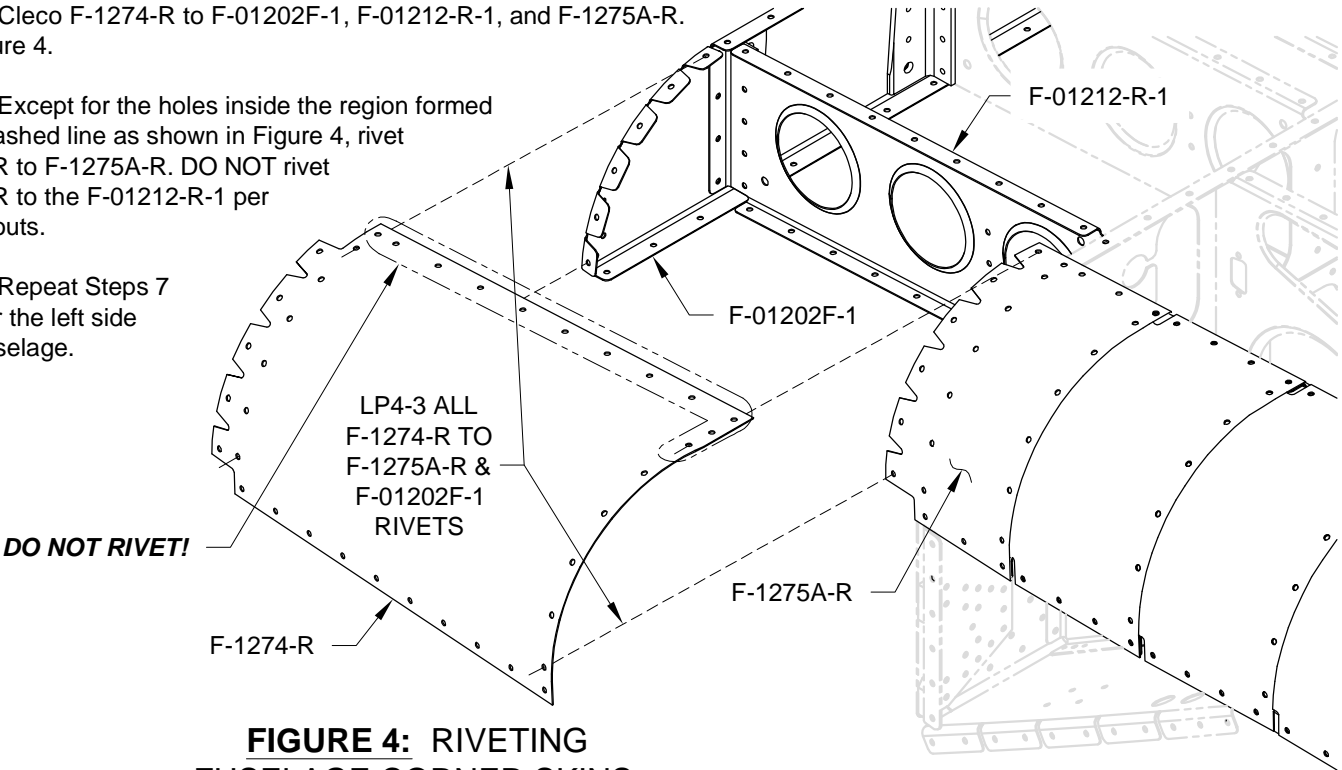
RIVETING FUSELAGE CORNER SKINS
